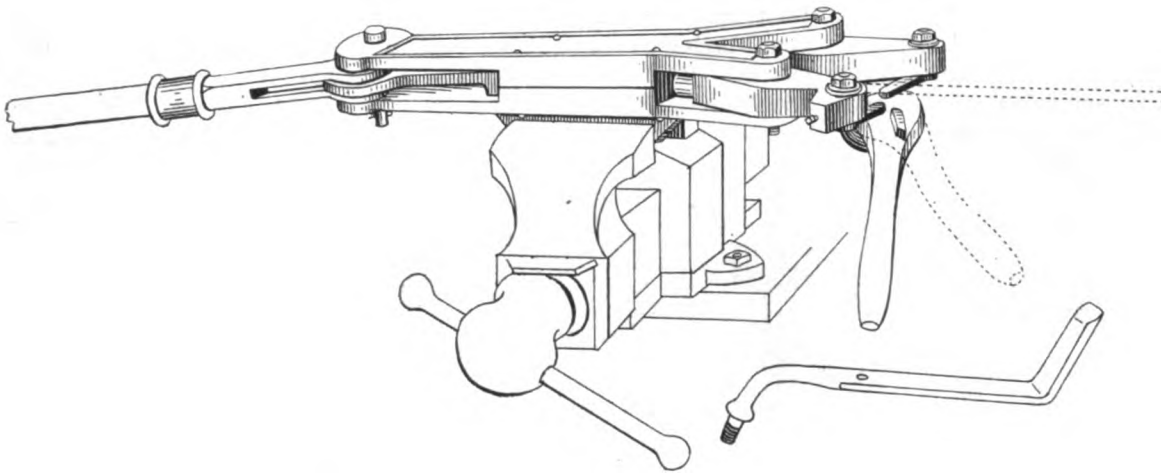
MACHINE FOR MAKING COLLARS ON CANOPY TOP STANDARDS.
